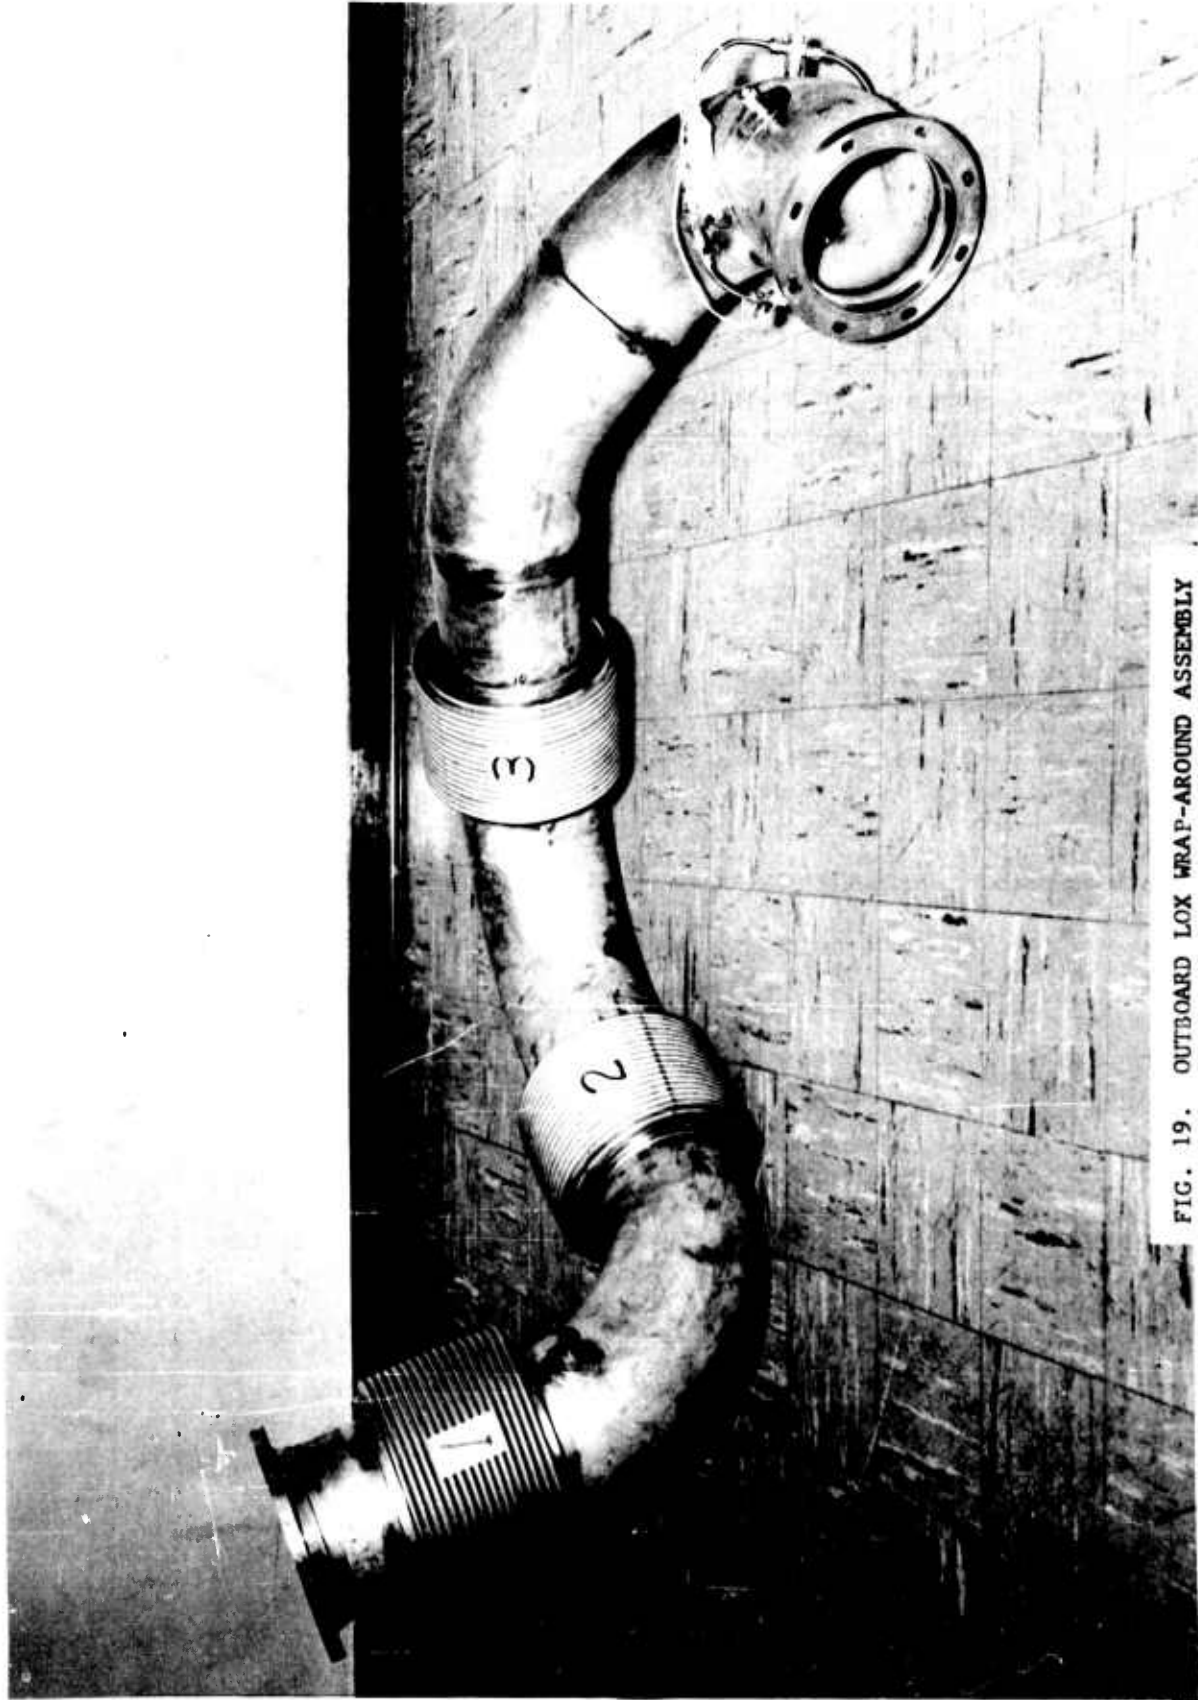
OUTBOARD LOX WRAP-AROUND ASSEMBLY
